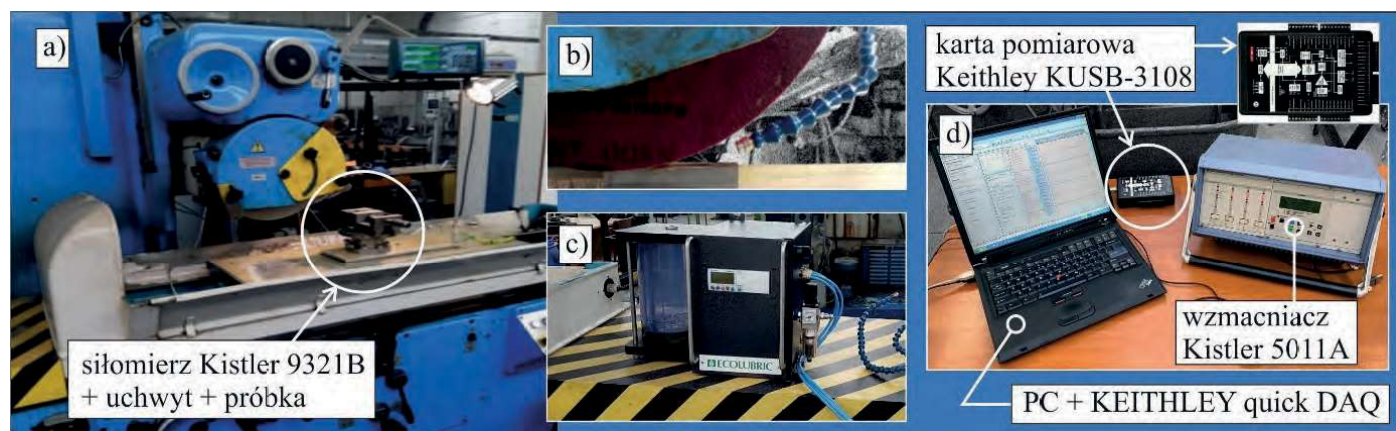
Test stand equipped with grinding machine type SPD-30b: a) general view, b) coolant nozzle setup, c) Ecolubric MQL Booster device, d) grinding force measurement devices
